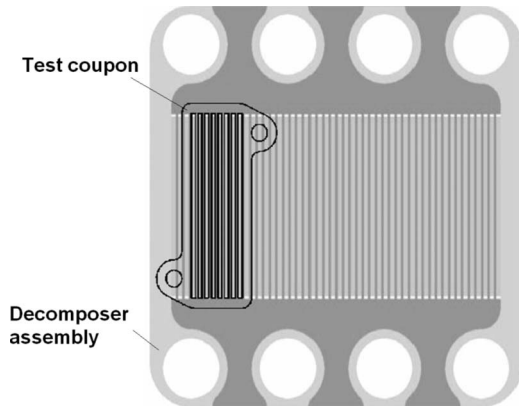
Comparison of test coupon geometry with heat exchanger assembly
